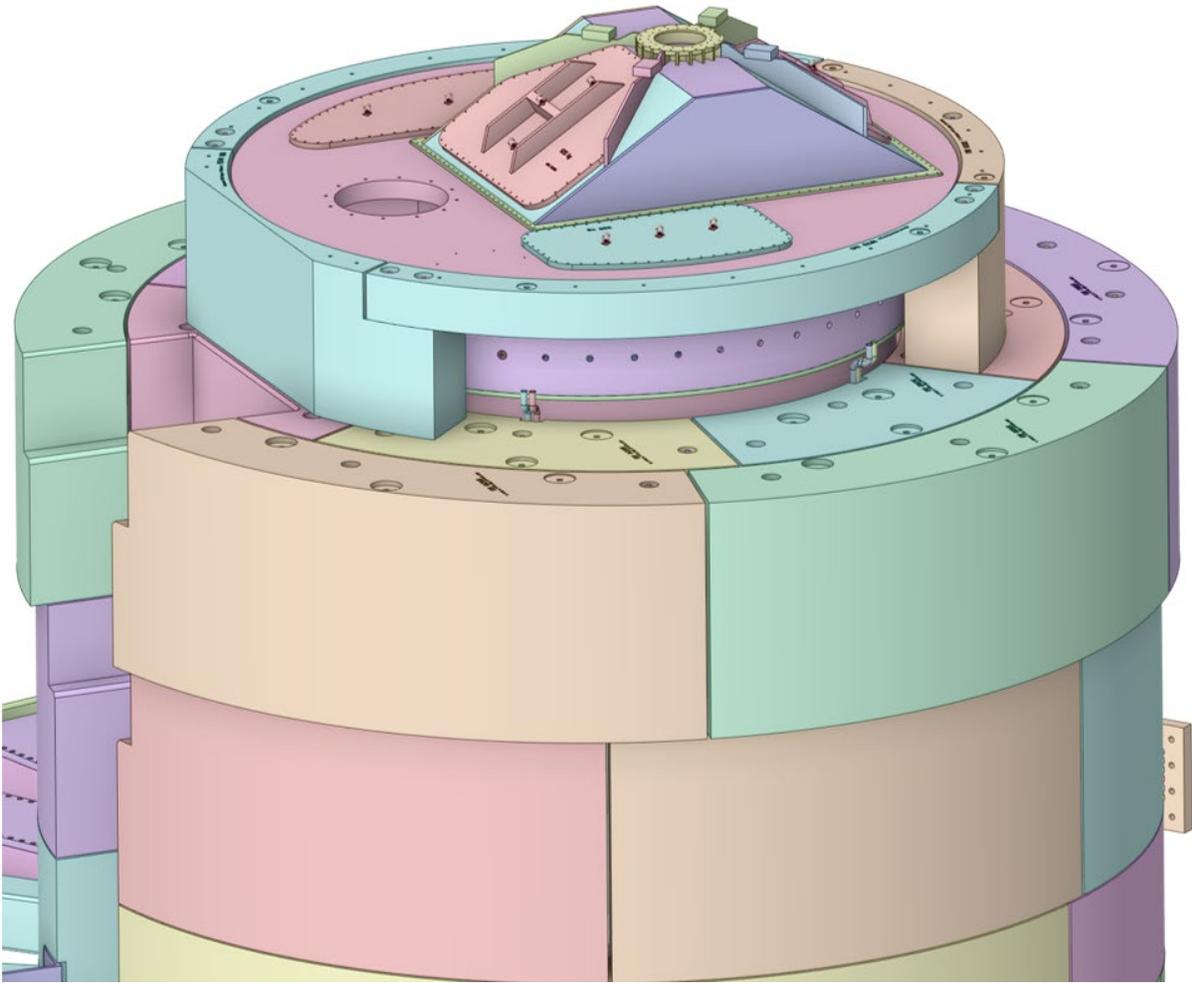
Bulk shielding installed up to layer 6 with CV installed
